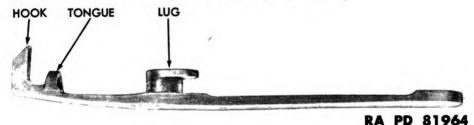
Extractor of U.S. Rifle, Cal. .22, M2
